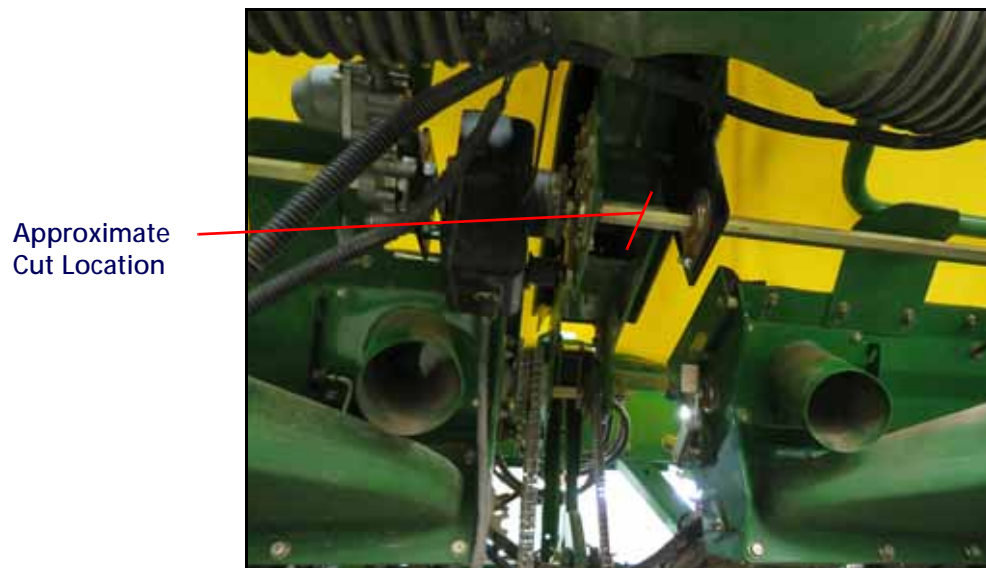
Left Hex Shaft in Bearing and Bracket
